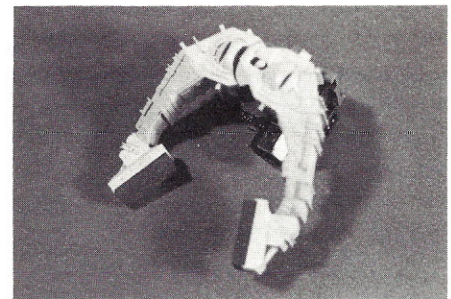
Close-up of the assembled gripper mechanism. Note the foam rubber pads at the finger tips.
